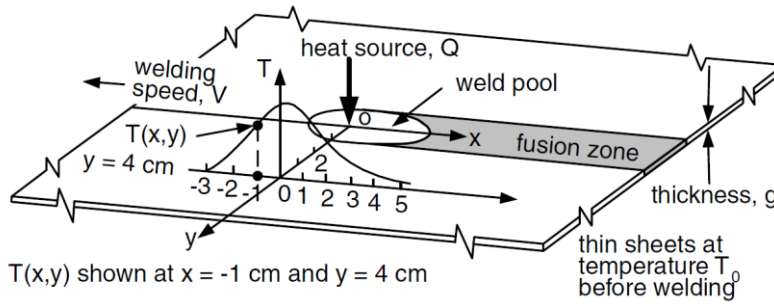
Two-dimensional heat flow of thin workpiece during welding. (2)
